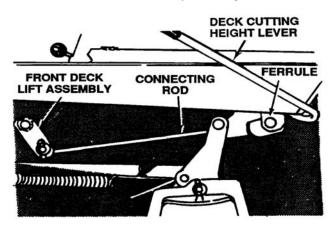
Deck Front-To-Rear Pitch Adjustment
